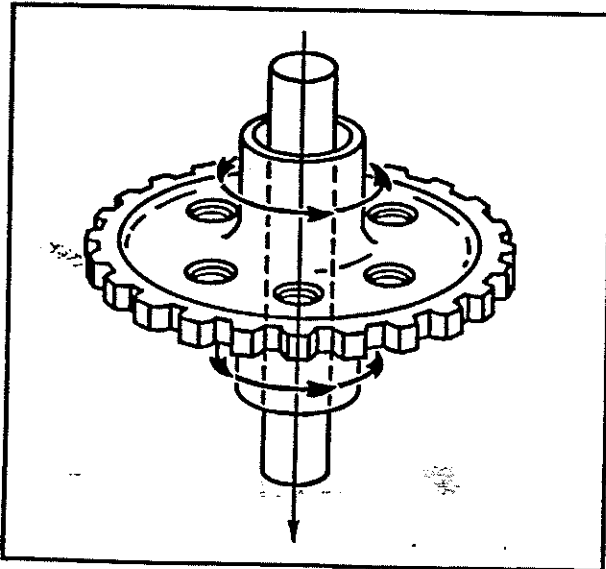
Magnetizing a Hollow Cylindrical Part
